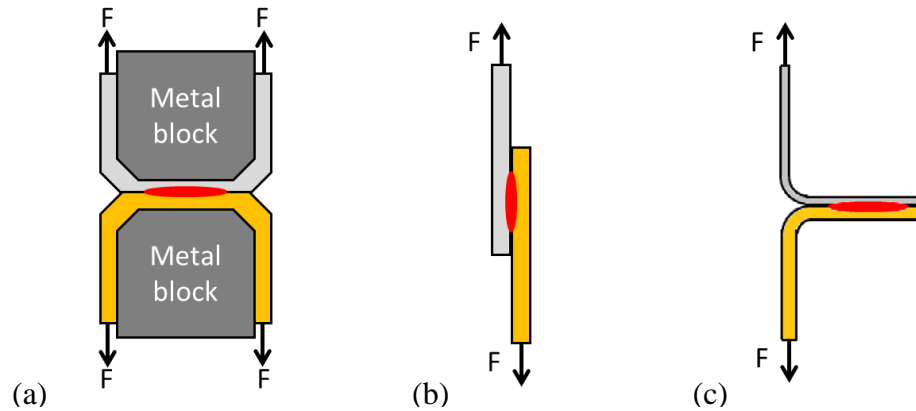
Mechanical test method for weld strength measurement: (a) U-tensile test, (b) lap-shear test, and (c) T-peel test.
